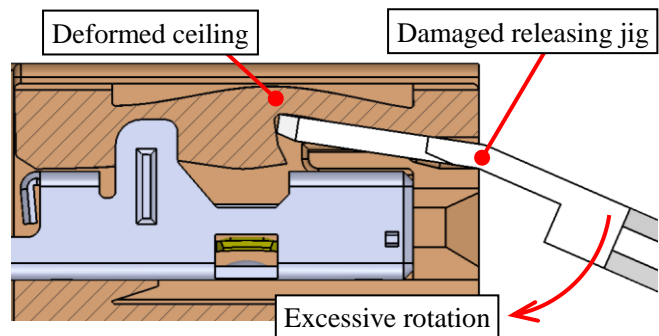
Deformed ceiling, Damaged releasing jig
